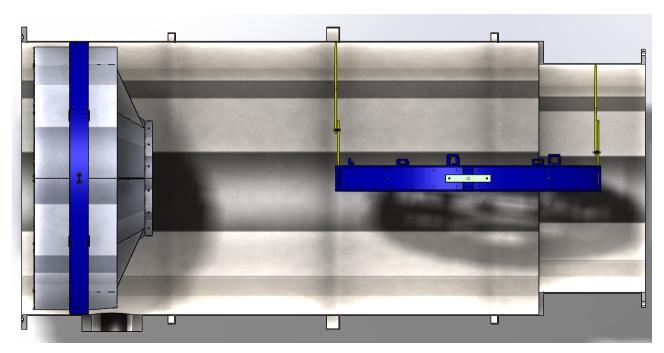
Periscope Assembly in the Staging Location with Rotation Stabilizing Bars installed.
